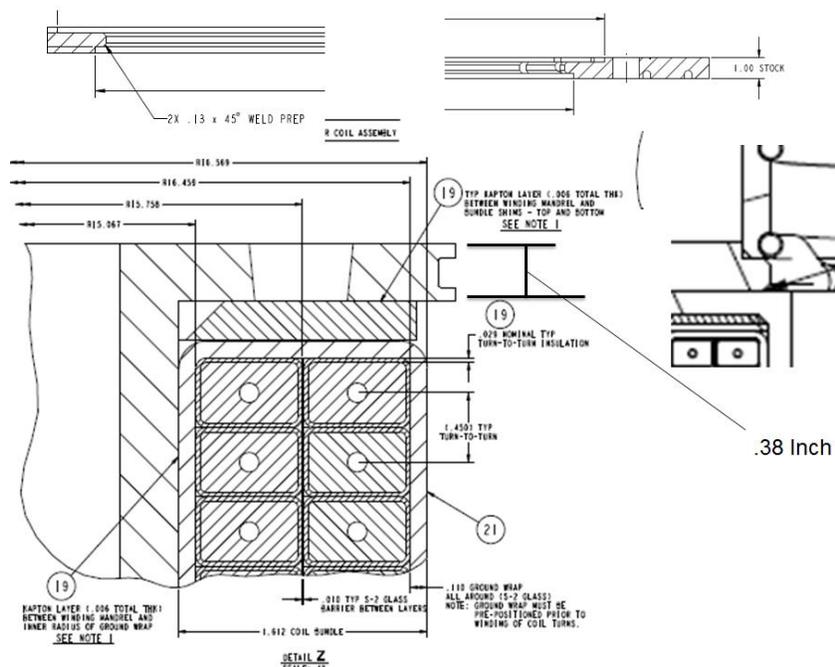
PF1b Mandrel Weld Details
